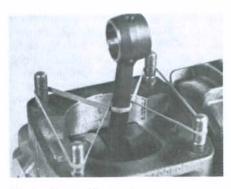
Use a rubber band as shown to protect engine parts from damage when cylinder and piston are off. Refer to text.
